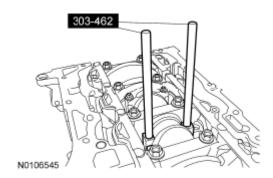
Removing Piston/Rod Assembly From Engine Block Courtesy of FORD MOTOR CO.
